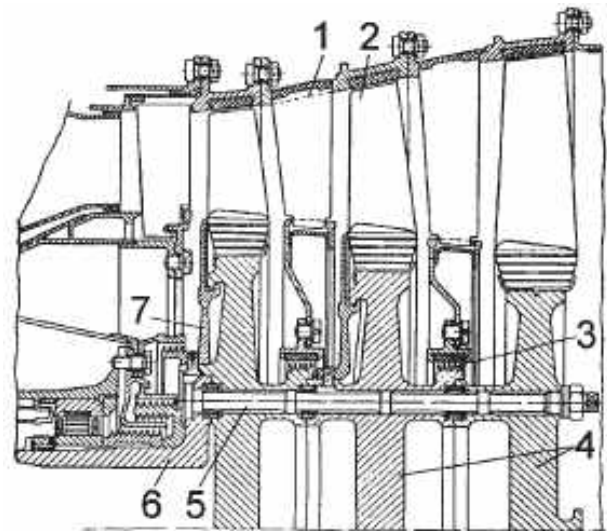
Three-stage single-shaft turbine: 1 - nozzle vane; 2 - rotor blade; 3 - labyrinth sealing; 4 - discs; 5 - precise coupling bolt; 6 - shaft; 7 - shield disc; 8 - support
